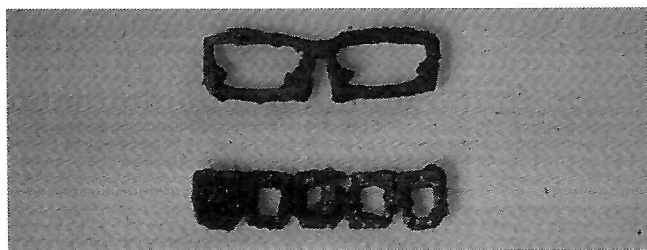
Unfettled buckle castings. The strip of five is 71mm long.
